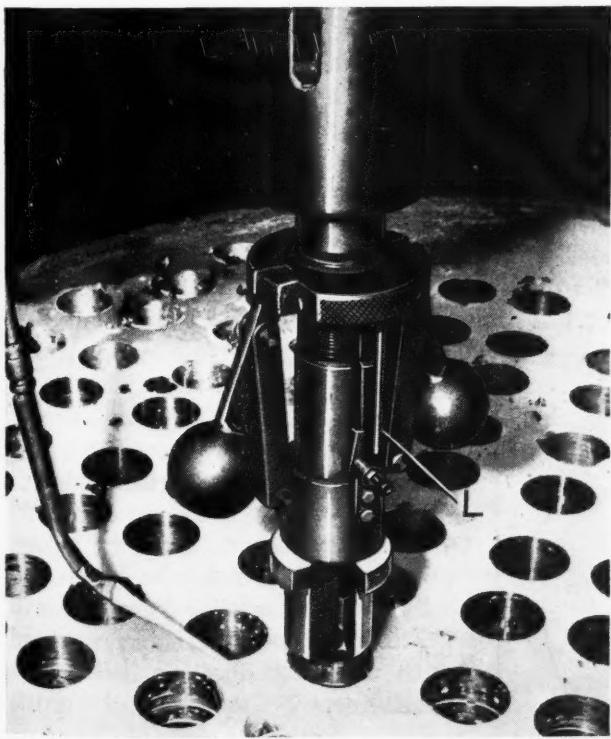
Recessing of drilled holes in a heat-exchanger tube is accomplished by means of a centrifugally operated tool-head
